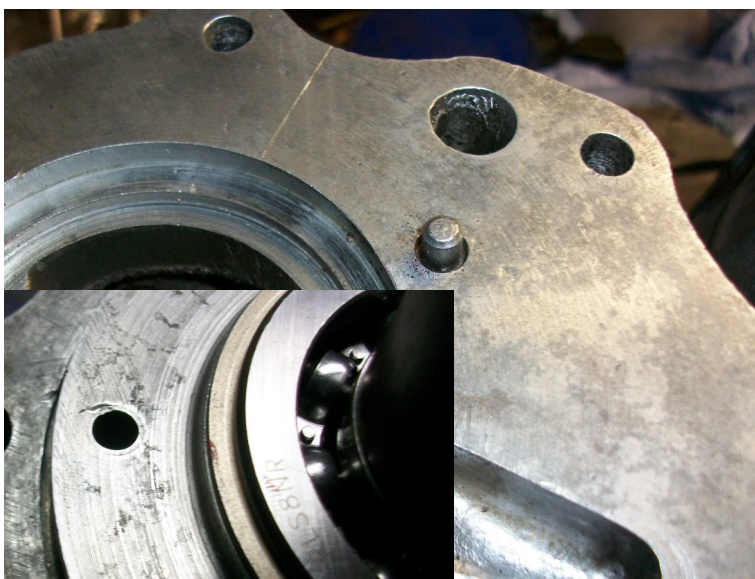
Locating peg in tail casing—inset—hole in bearing housing
